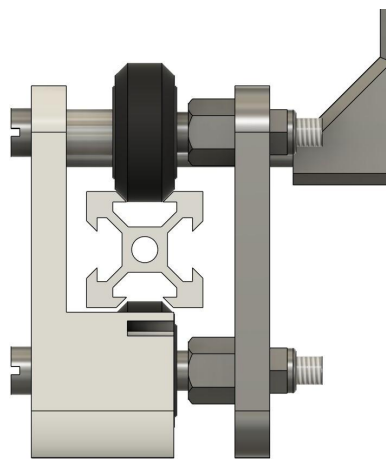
Side view of the cart mounted on the aluminum profile.
